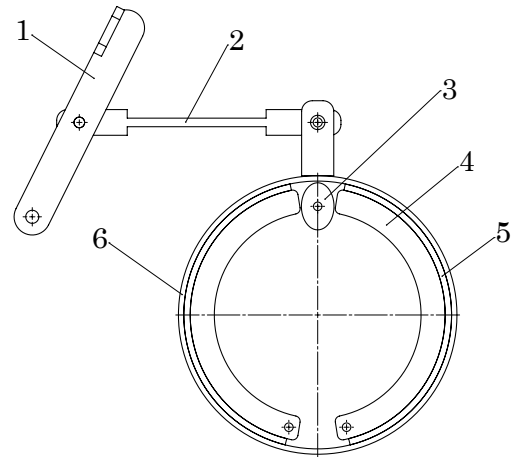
A typical drum brake with mechanical actuation: 1) brake pedal, 2) connecting rod, 3) S-cam, 4) two brake shoes, 5) brake linings, 6) brake drum.
